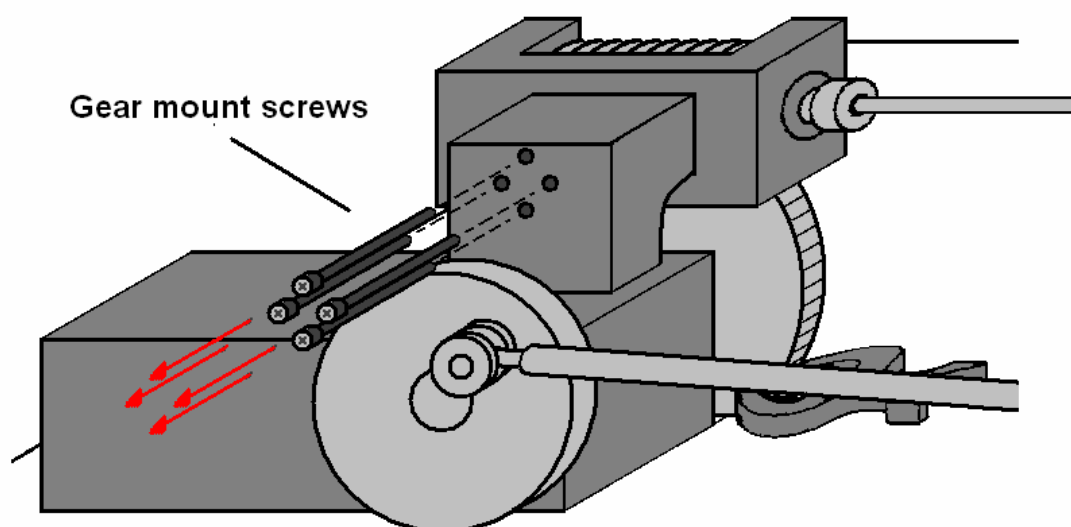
Illustration of gear setup and screws used to fix the worm gear in place.
